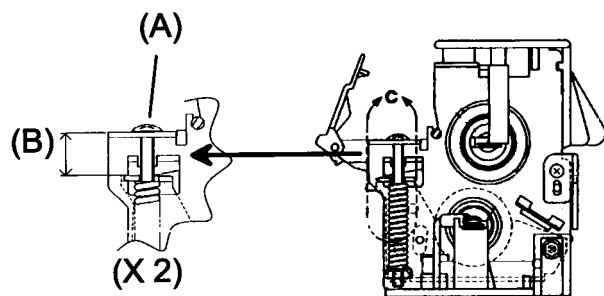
MAIN FUSER ASSEMBLY Adjustment (1/3)
